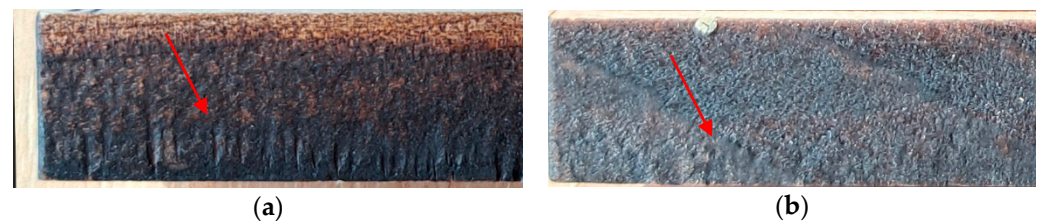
Surface defects (cracks) that occur when cutting wood with the laser at a 15° angle relative to the grain: (a) maple; and (b) beech. The red arrow indicates the location of the defects, which are on the lower side of the specimens.
